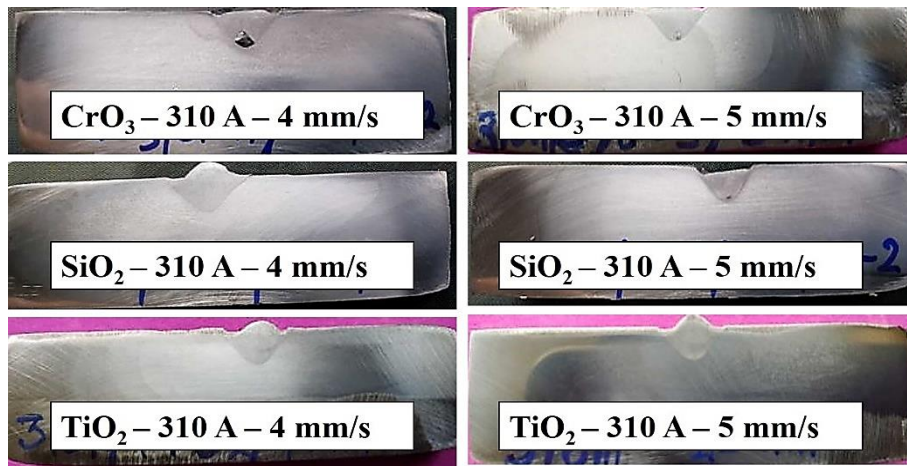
Macrograph of AA – TIG welding of different welding speed and different activated flux welded at 310 A
